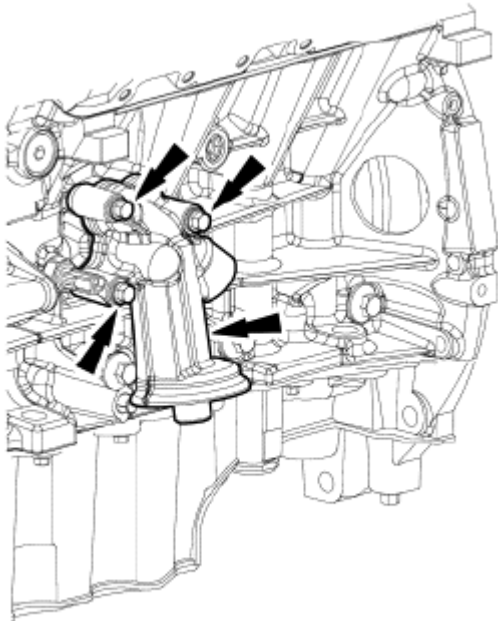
Locating Oil Filter Adapter, O-Ring Seal & Bolts
